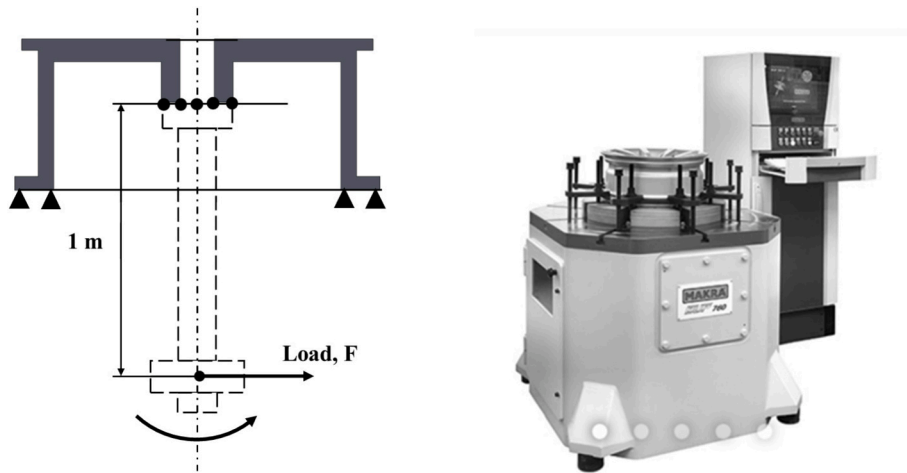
MAKRA rotating bending test bench used for the experimental fatigue campaign.
